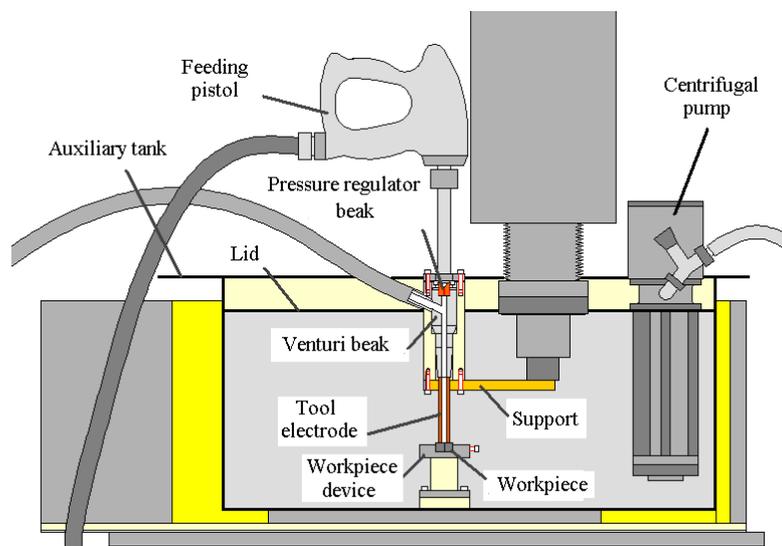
Schematic drawing of the auxiliary tank assembled to the machine
